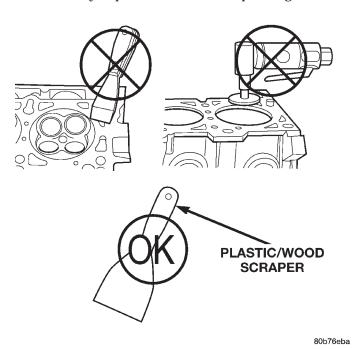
Proper Tool Usage For Surface Preparation FNGINF CORF PLUGS
